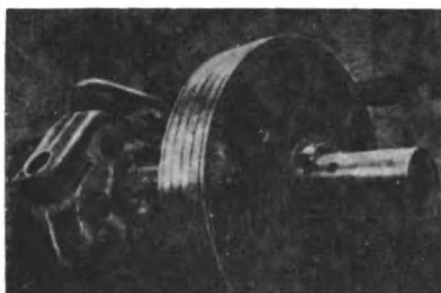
Crosshead with rod and piston on the balancing stand
